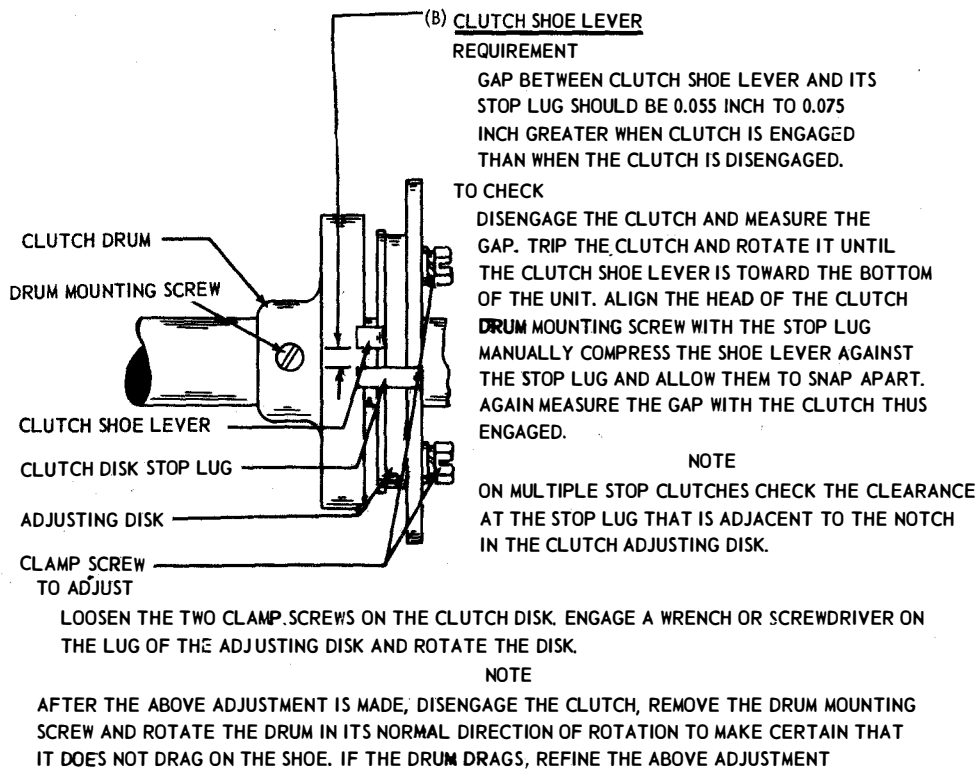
Automatic Typewriter, Clutch Shoe Mechanism (All Clutches)
